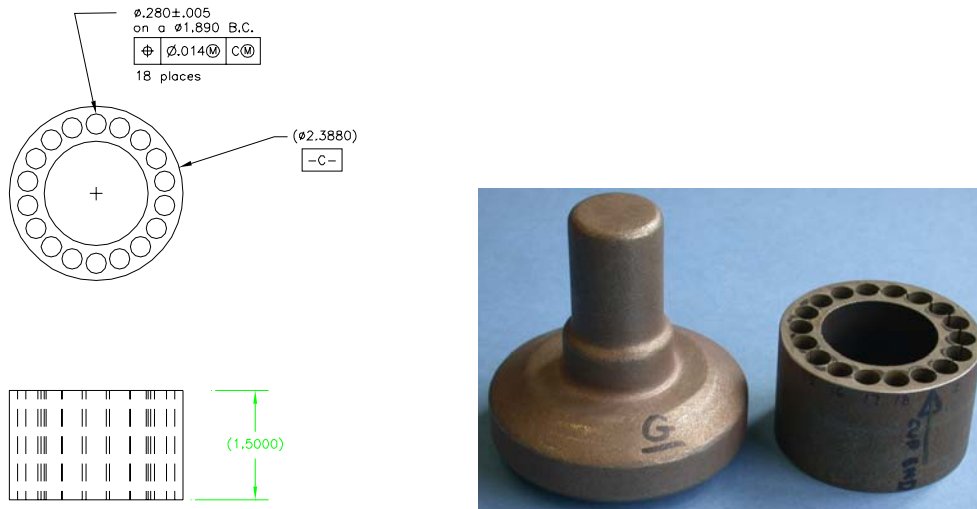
Tensile specimen cylinder removal plan and post-EDM photograph for HERF reservoir forging G.
